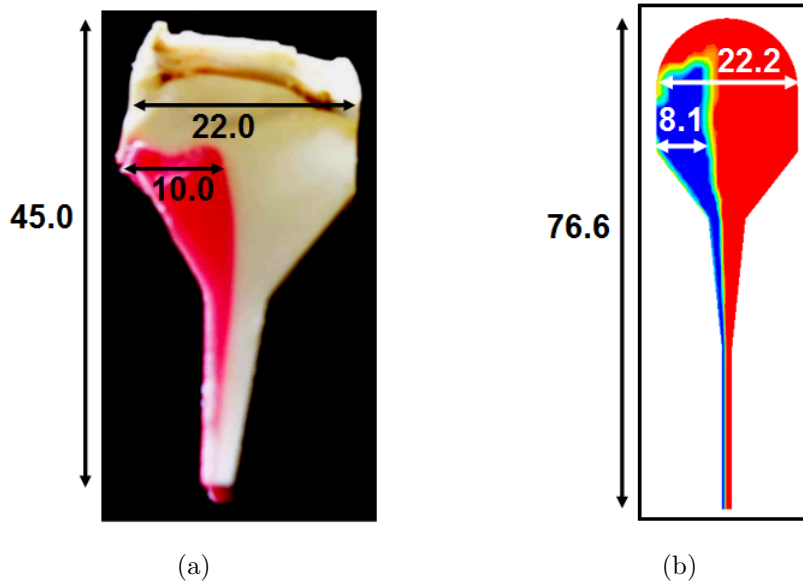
The flow configurations 335 mm into the die body for Sample 3 where (a) shows the die plug structure and (b) shows the CFD structure. All dimensions shown are in millimetres.
